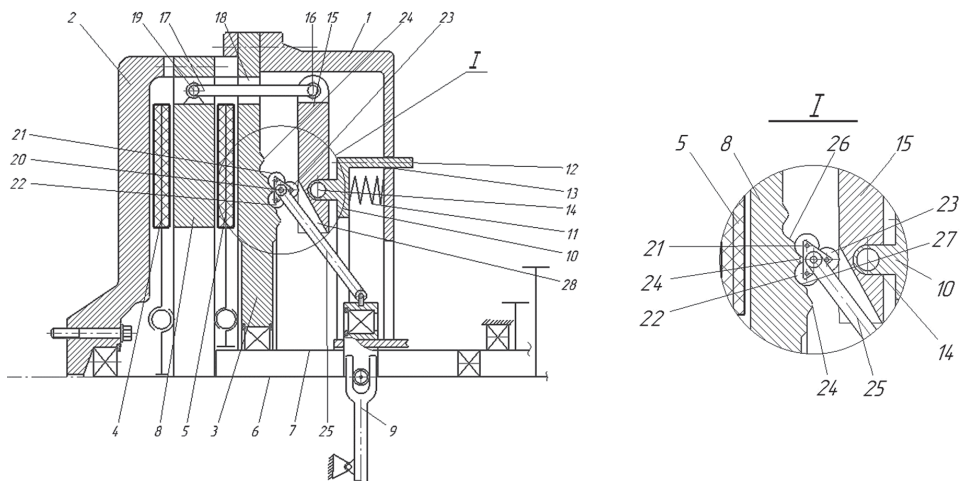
The original DCT design: 1—casing; 2—flywheel; 3—platter; 4,5—driven discs; 6, 7—shafts; 8—pressure plate; 9—drive mechanism; 10—additional disc; 11—pressure springs; 12—elements; 13, 18—holes; 14, 16, 19—hinges; 15—rotary stops; 17, 25—levers; 20—movable supports; 21–23—rollers; 24—clamps; 26, 27—surfaces; 28—inclined grooves.
